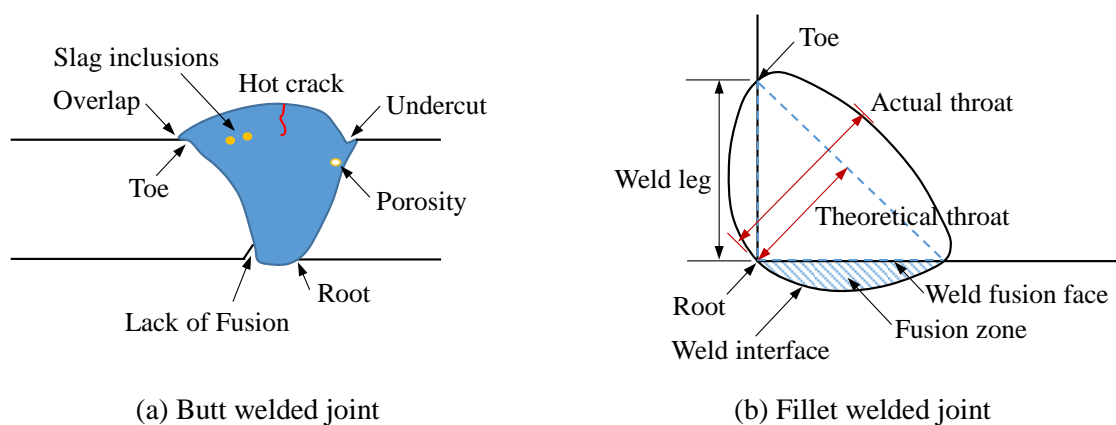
Cracks of butt weld and fillet welded joint
